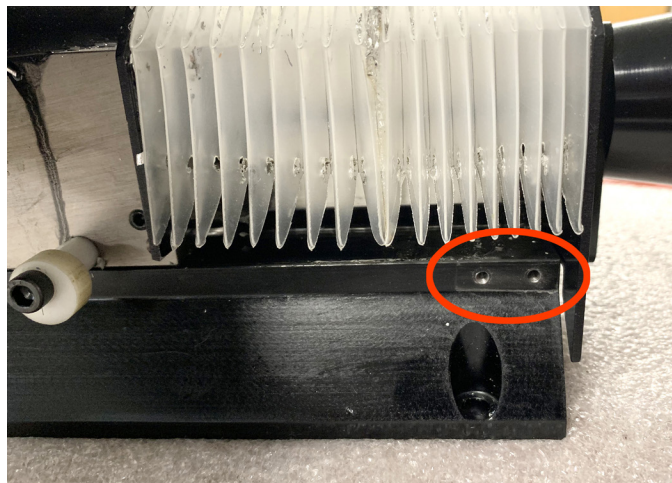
The red oval shows the mounting hole location for the Y-axis limit switch assembly.
